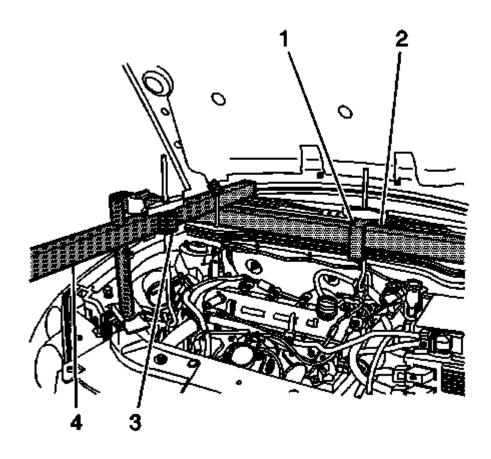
Engine Support Fixture And Cross Bracket Courtesy of GENERAL MOTORS COMPANY
